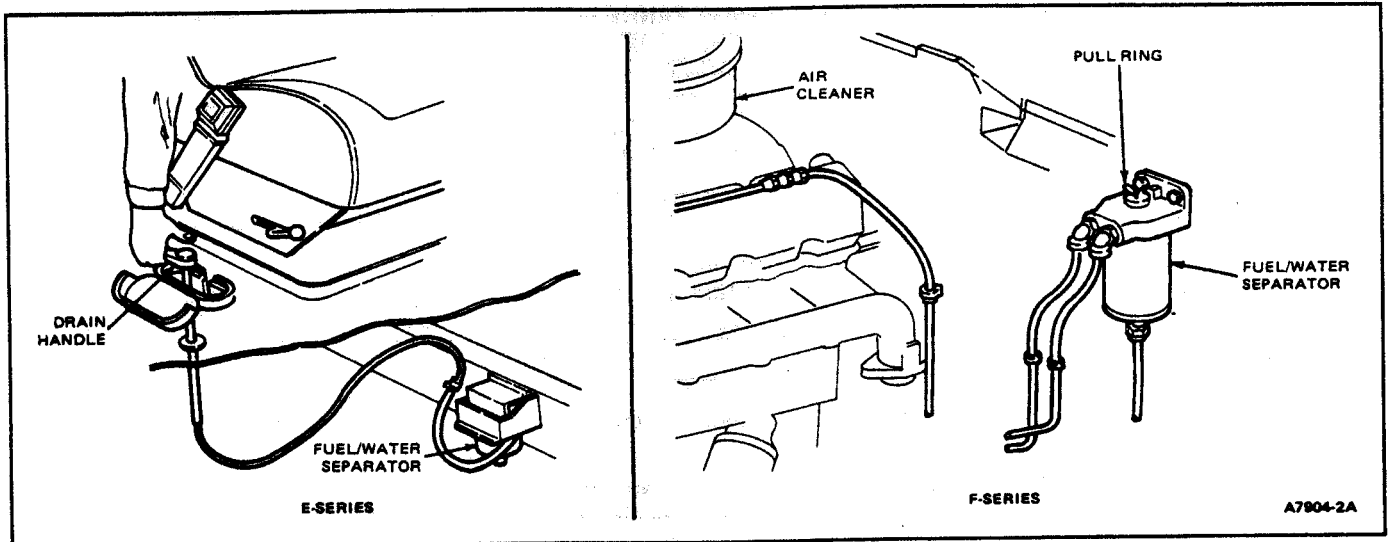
Fuel/Water Separator—6.9L Diesel Engine
